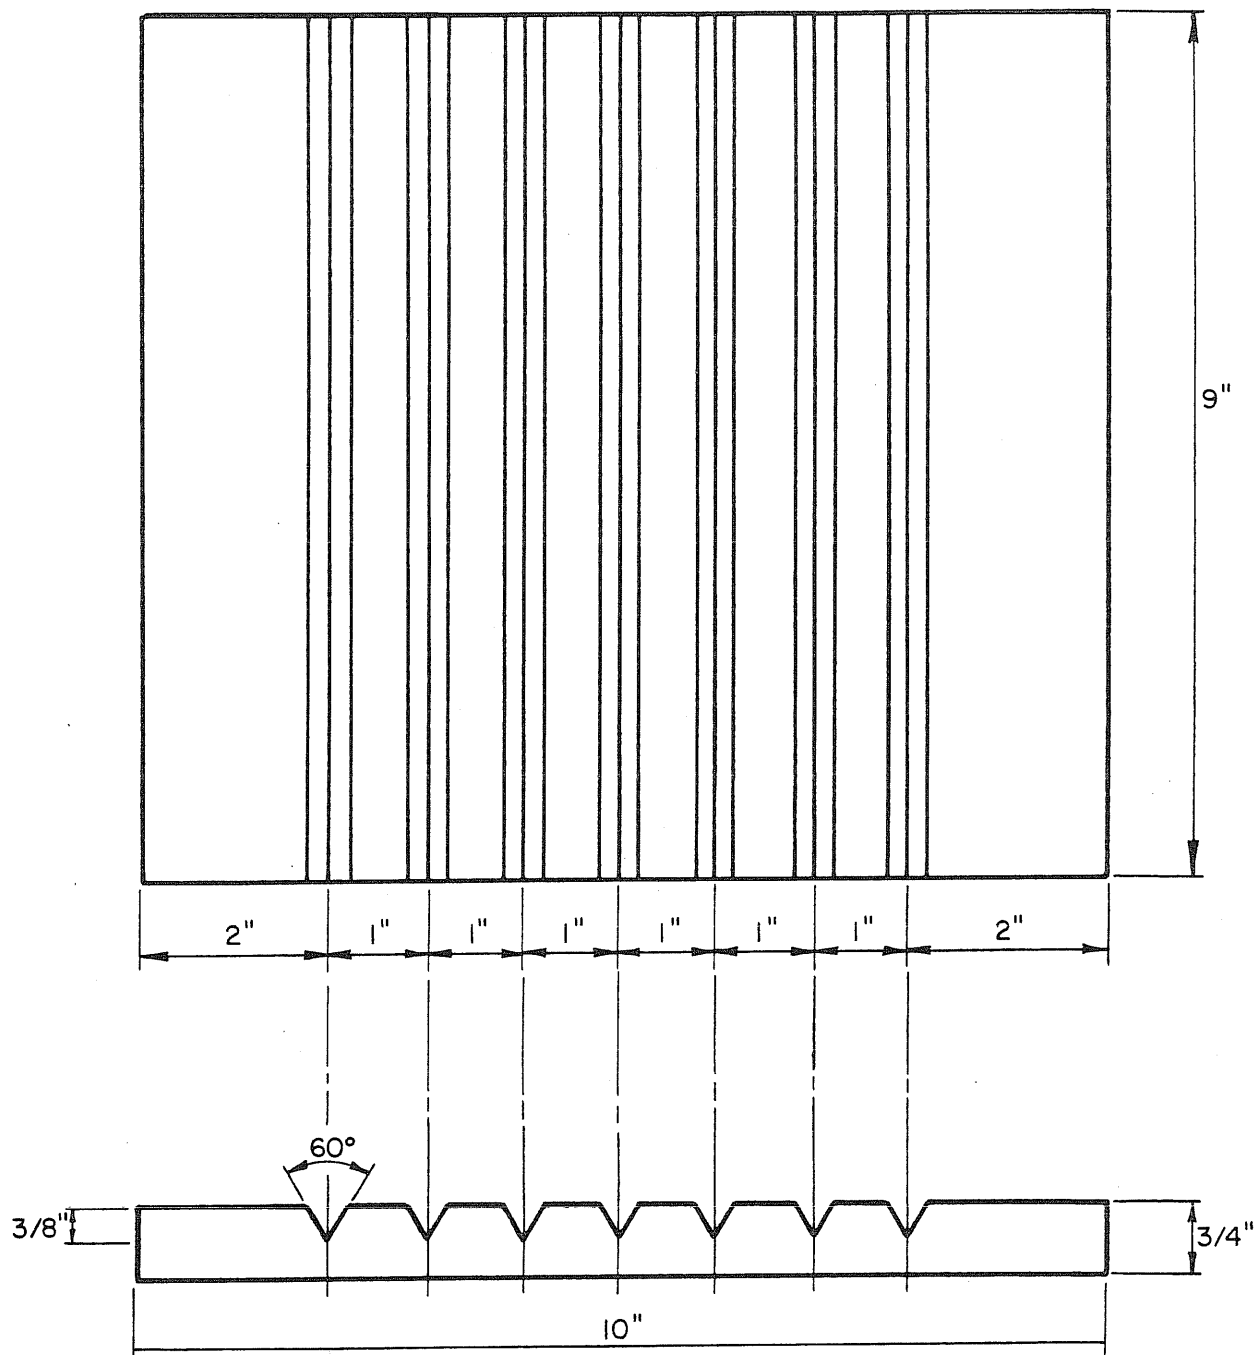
SKETCH OF V-GROOVE SAMPLE WELD PLATES
